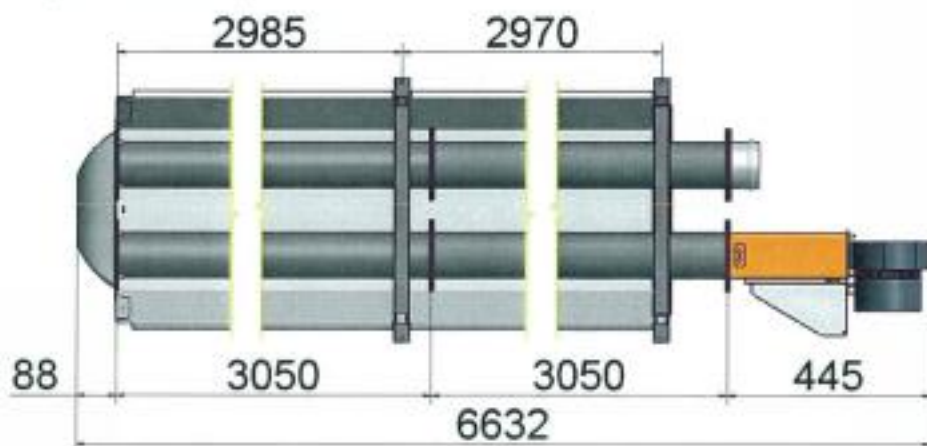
Dimensions novoSchwank 15U / 20U / 30U / 40U (view from below)
